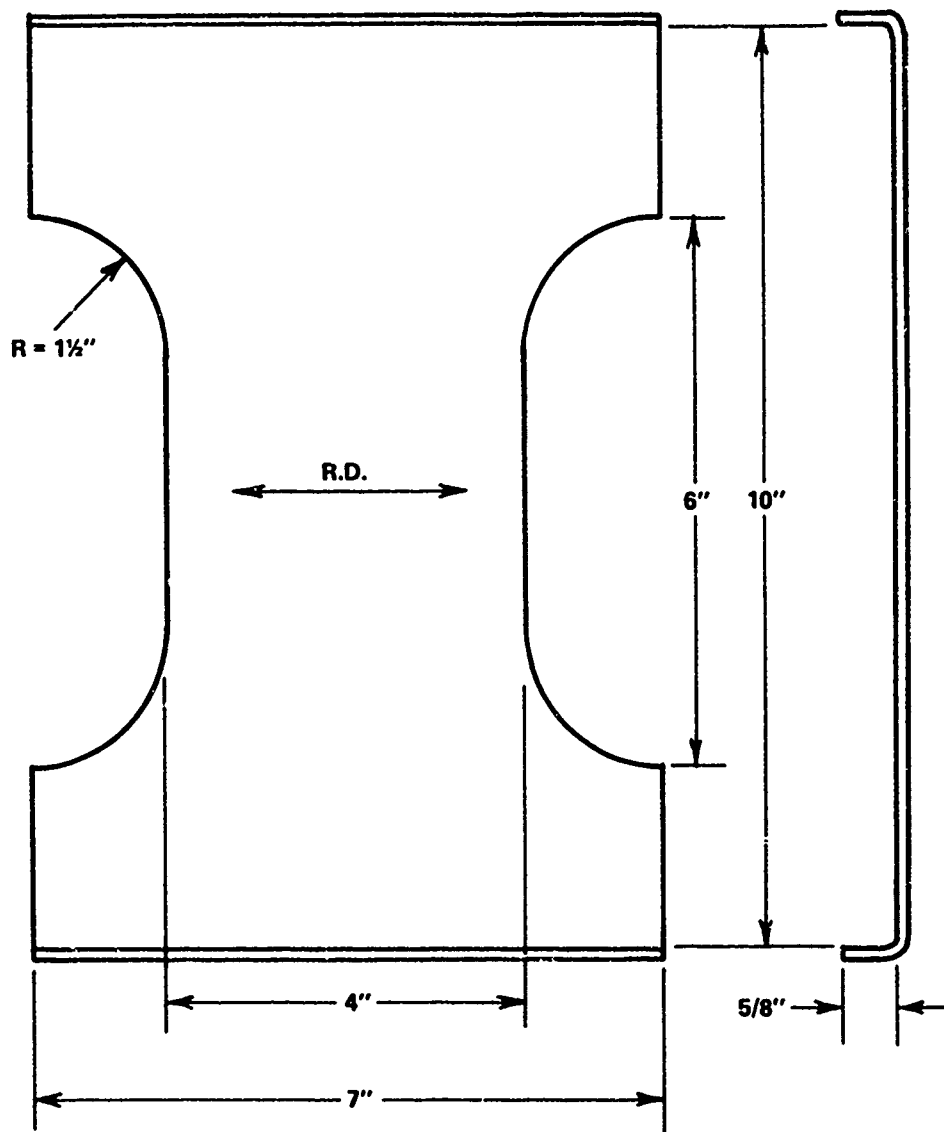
Explosive Stretch Forming Workpiece Configuration.
